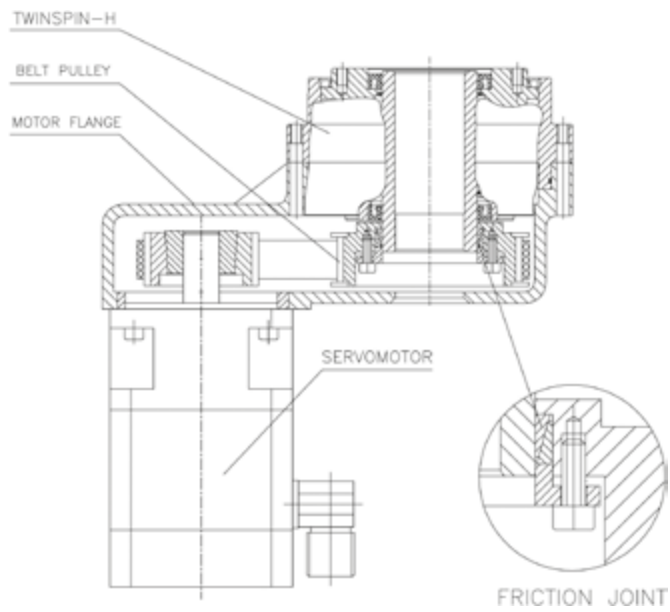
Connection of a toothed pulley with the reduction gear shaft by means of a friction connection
